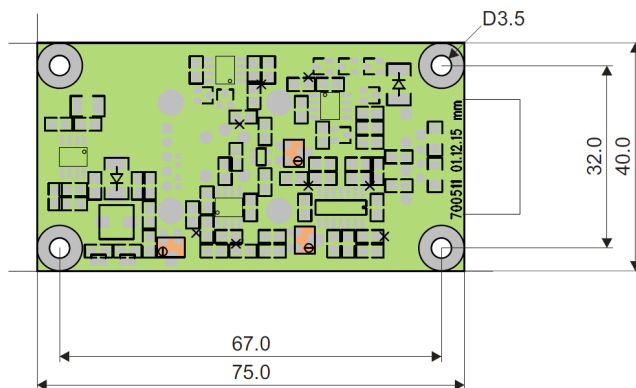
PCB electronic layout for FCX-MLxx-CH/FCX-MLxx-Extern-CH
